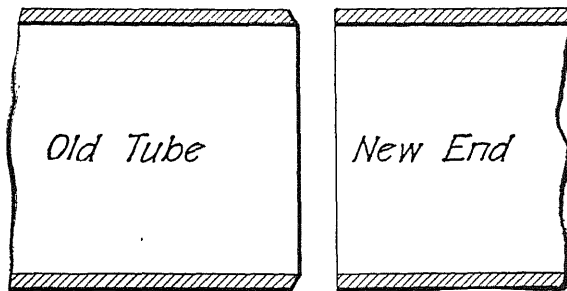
Ends Prepared for a Flash-Weld.
